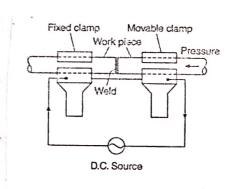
Setup for Resistance Butt Welding
